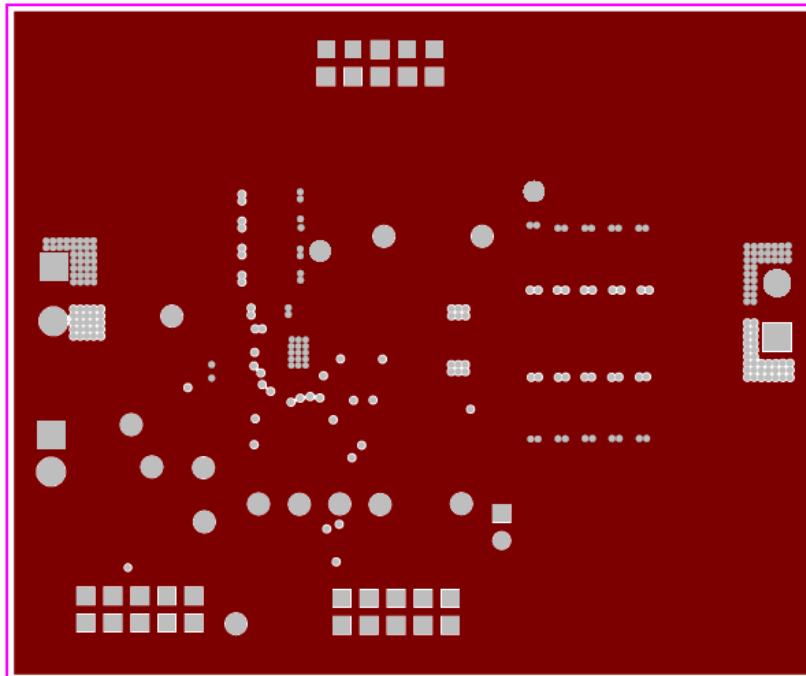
TPS548A20EVM-587 Top-Layer Assembly Drawing
